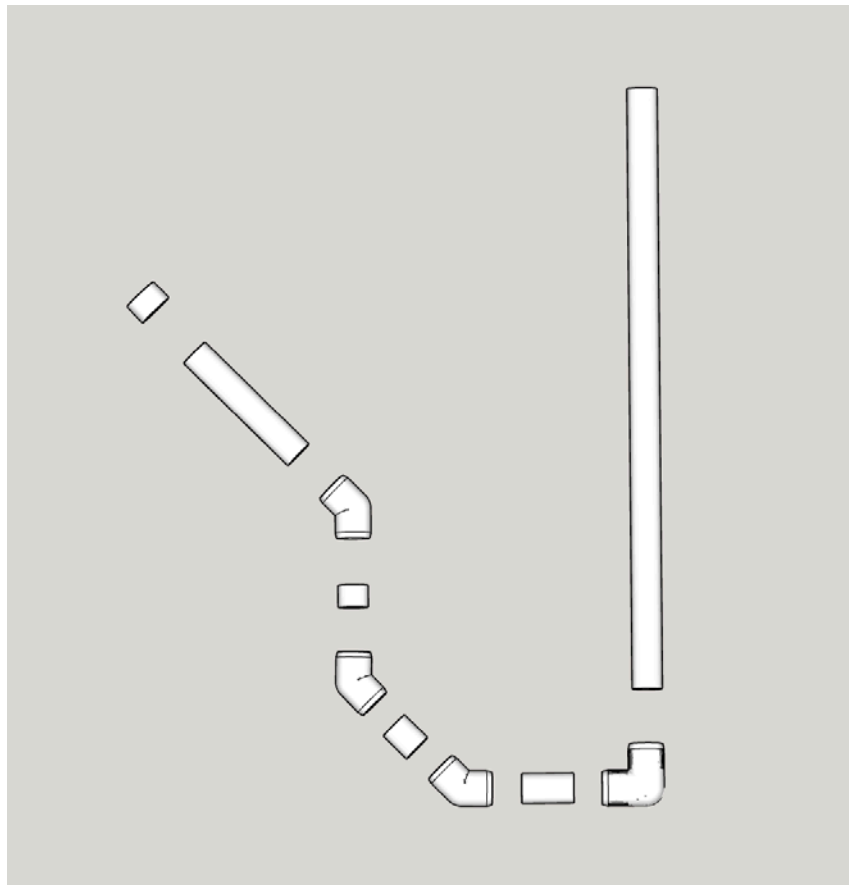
Exploded view of elbow assembly with vertical pipe.
